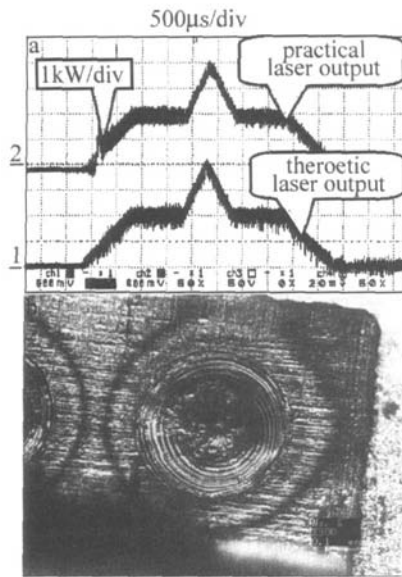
Laser power wave and its laser welding spot photograph
